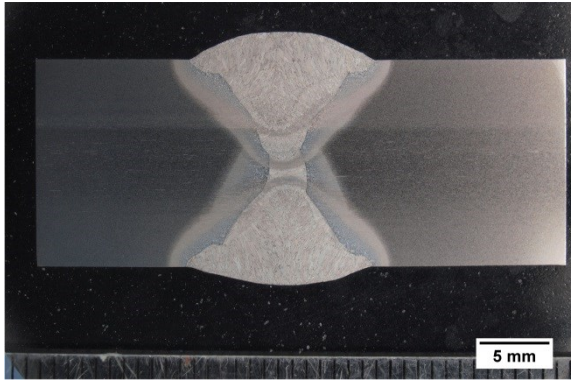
Macrograph of MAG welded sample 1 was taken with Leica MZ12 stereo microscope.
